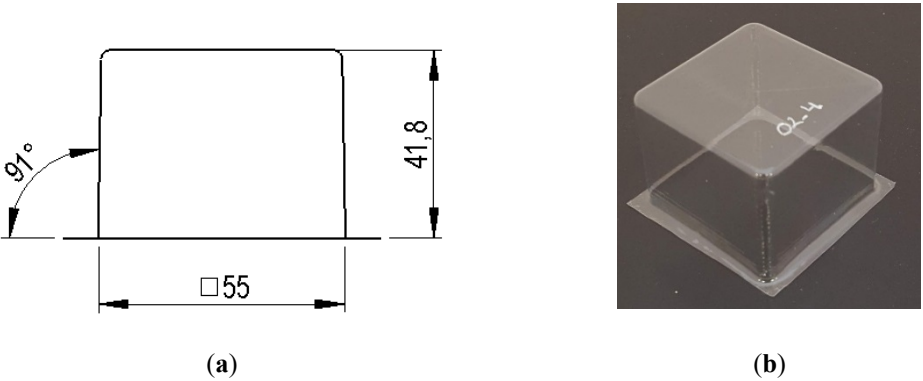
Images and dimensions of the plain test specimen, O2: a) general dimensions, b) test specimen.
